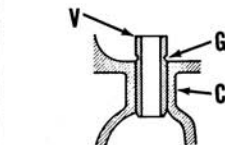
Valve guide protrusion on 1GM engine is 7 mm, as measured from top of cylinder head (C) to top of valve guide (G). On all other models valve guide is driven into cylinder head until bottom of groove (G) is flush with top of cylinder head.
